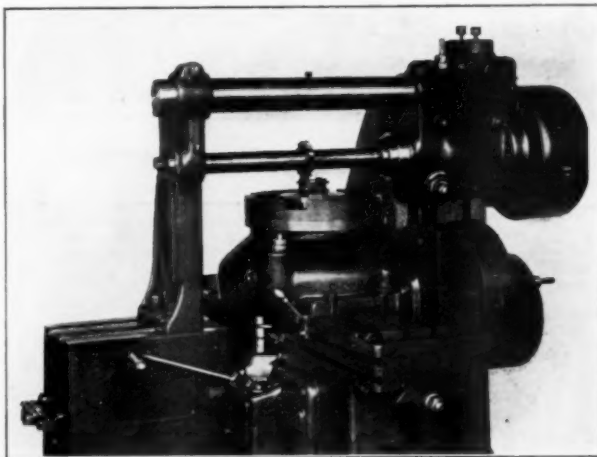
PRESENT DESIGN OF MILLING MACHINE
